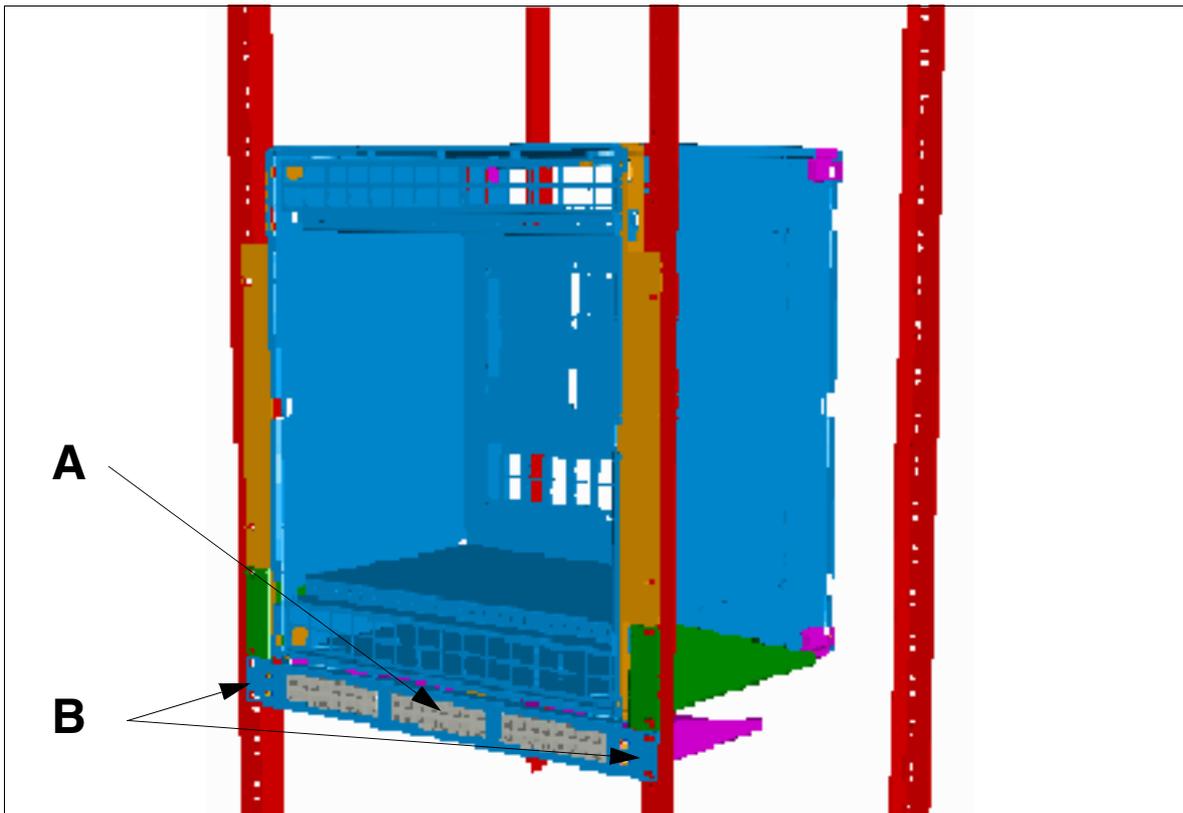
HiPath 3700 - Mounting the Patch Panel
